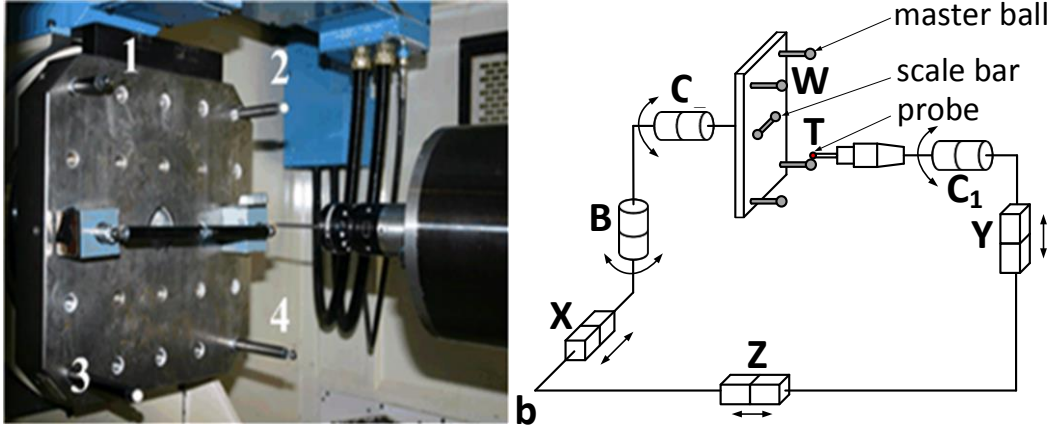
left: SAMBA artefact probed on the machine tool for  $[b, c]=[0, 0]$ ; right: five-axis machine tool kinematic model with the topology WCBXbZ $Y C_1 T$ ; W - workpiece, T - tool, b - machine base, B, C – rotary axes around the Y and Z axes respectively, X, Y, Z – machine linear axes,  $C_1$  – spindle
